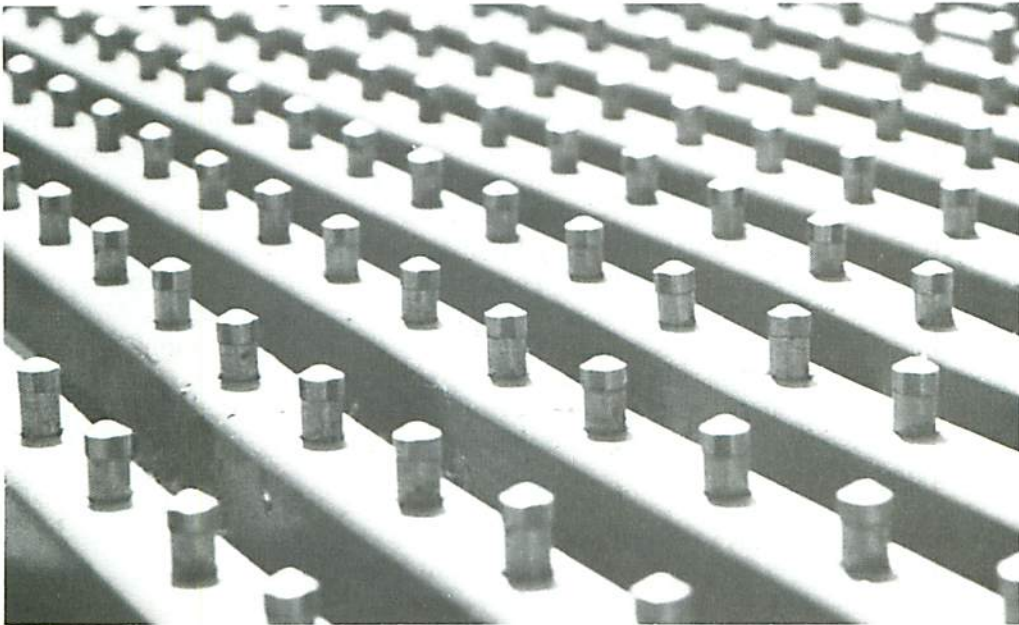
Mouthpieces on lower side of mouthpiece carriage (inverted).
